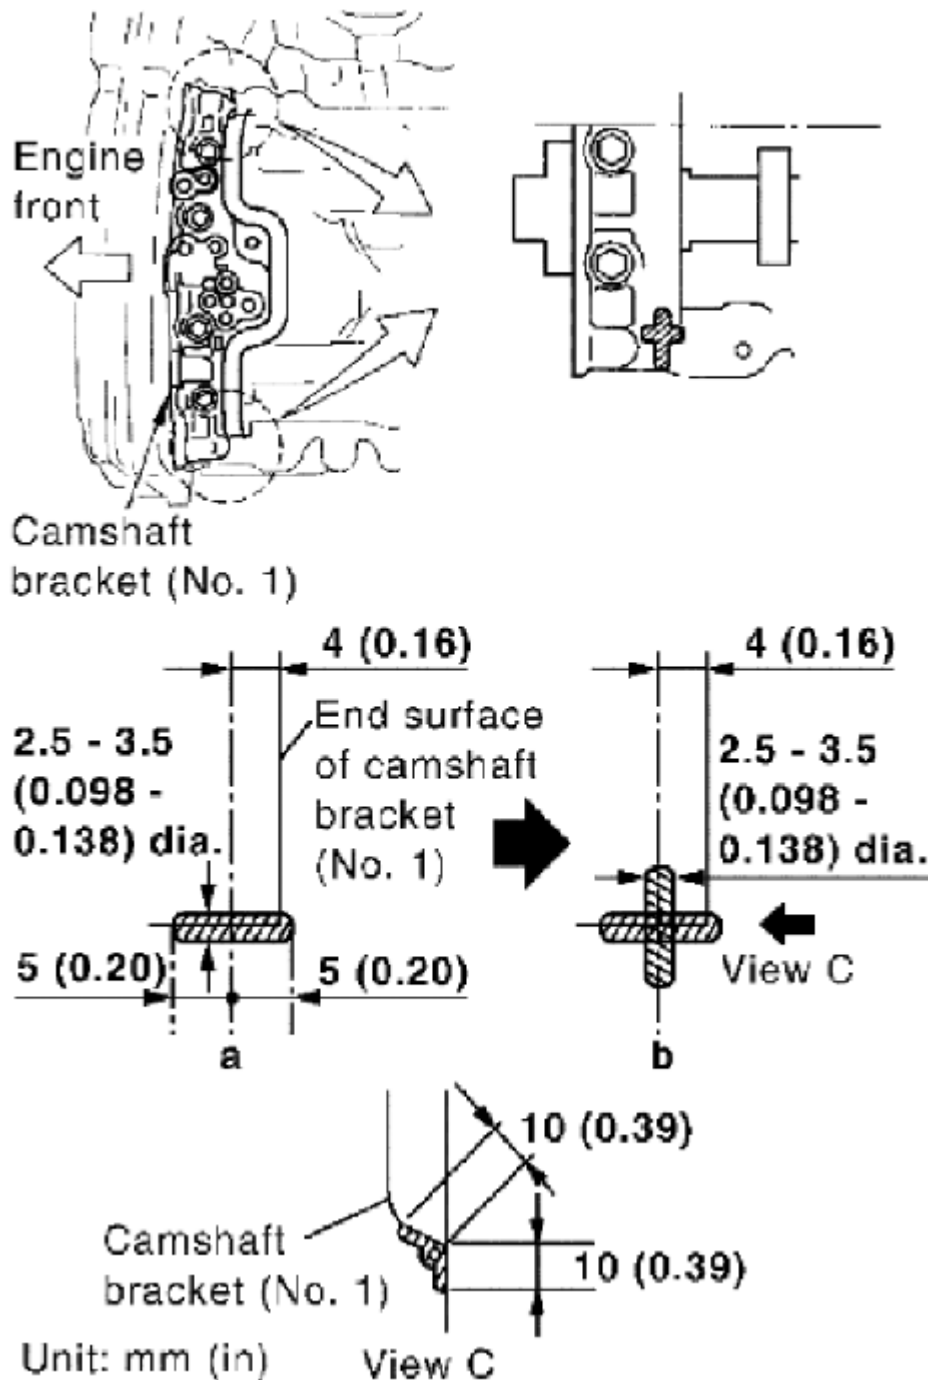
Applying Liquid Gasket Using Tool To Joint Part Among Rocker Cover, Cylinder Head
